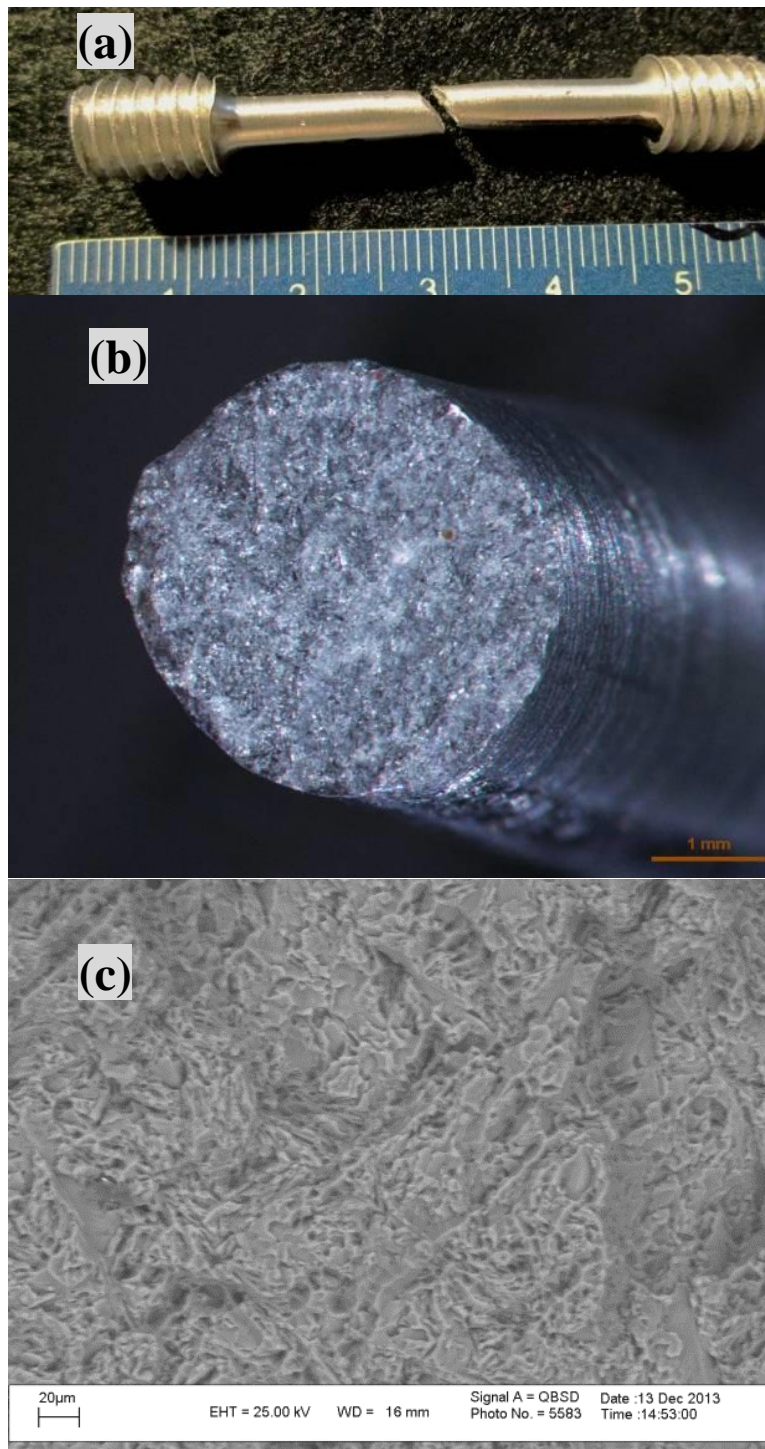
A Fractured TSP-treated A4047 Tensile Bar: (a) Photograph of Fractured Sample, (b) Stereo Photograph of Fracture Surface, and (c) Back-scattered Electron Micrograph of Fracture Surface.
